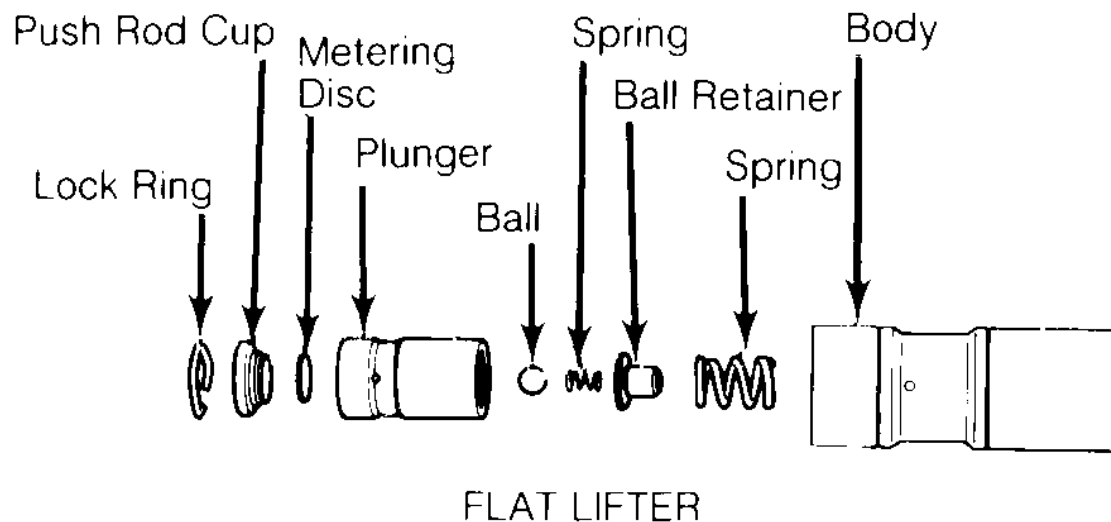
Typical Hydraulic Valve Lifter Assemblies
